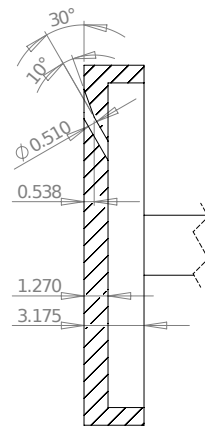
Drawing of one row of cylindrical hole test coupon; freestream flow from bottom to top; dimensions in mm
